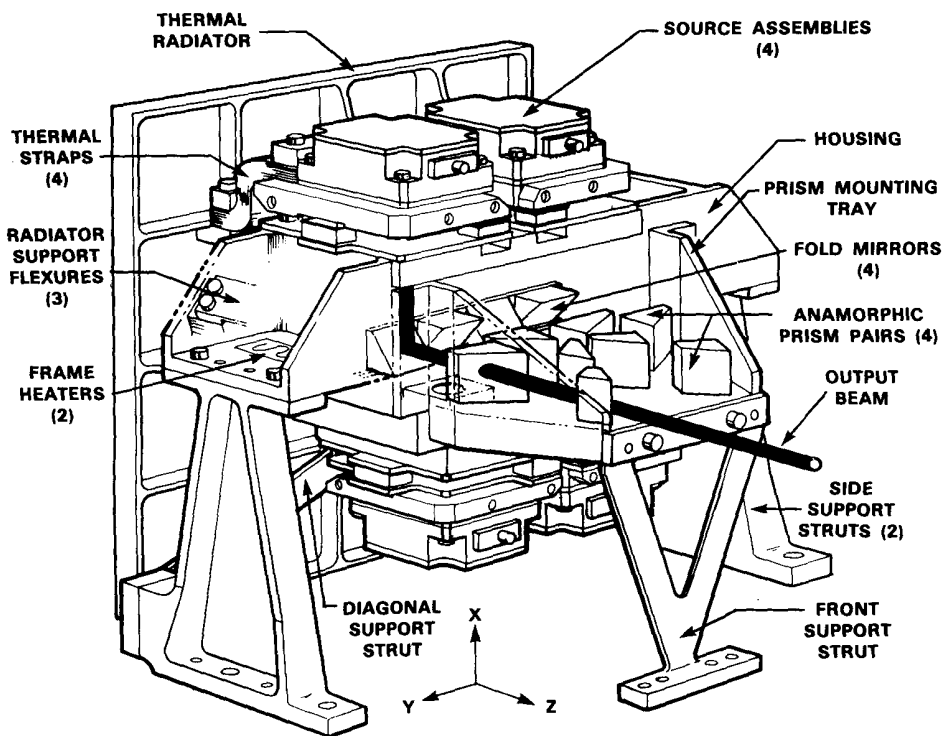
Transmitter configuration shown without environmental cover or wiring harness.
